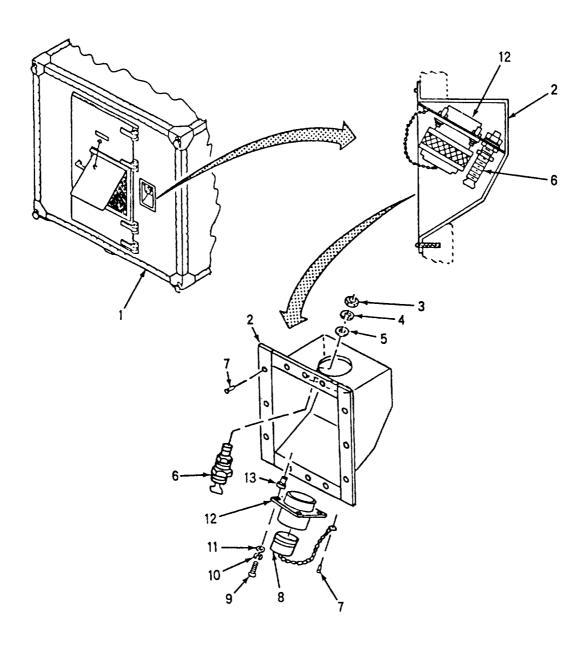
Shelter Assembly (Sheet 1 of 2)
